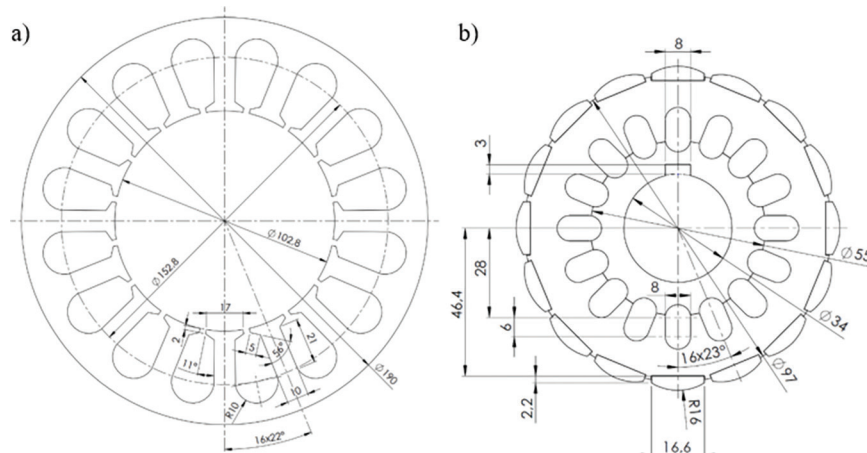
(a) Stator geometry during the design process and (b) rotor geometry during the design process—all dimensions are in millimetres.
